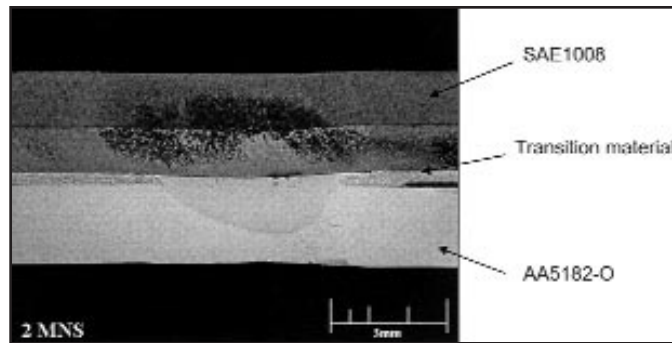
Weld cross section at 8 cycles weld time: initial melting observed.
